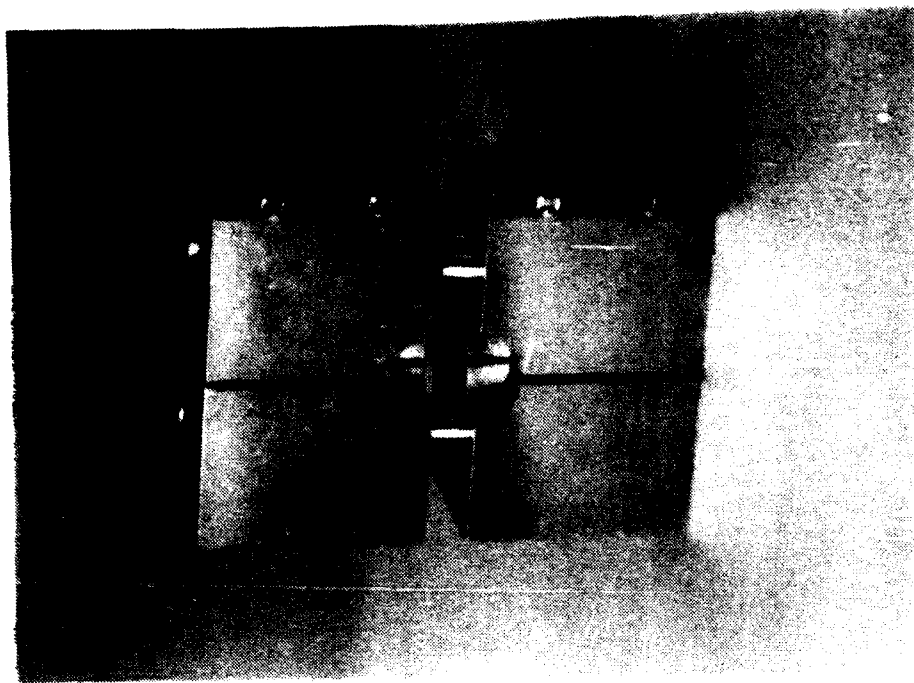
Schematic of Wyoming End-Loaded, Side-Supported Compression Test Fixture with Specimen Installed [25]
